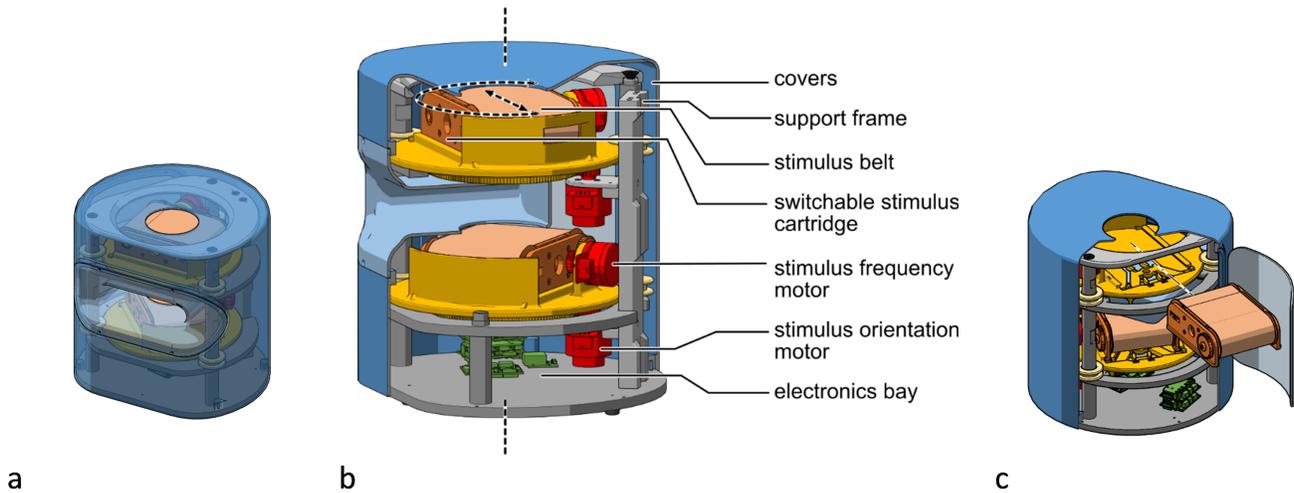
CAD views of the RoMAT. The figure shows three CAD representations of the RoMAT device. View (a) shows an external view of the system with the covers in transparency. View (b) shows a cross section of the device, highlighting its main parts and components. View (c) represents the quick-switch system for substituting the “cartridges” carrying the various stimulation patterns.
